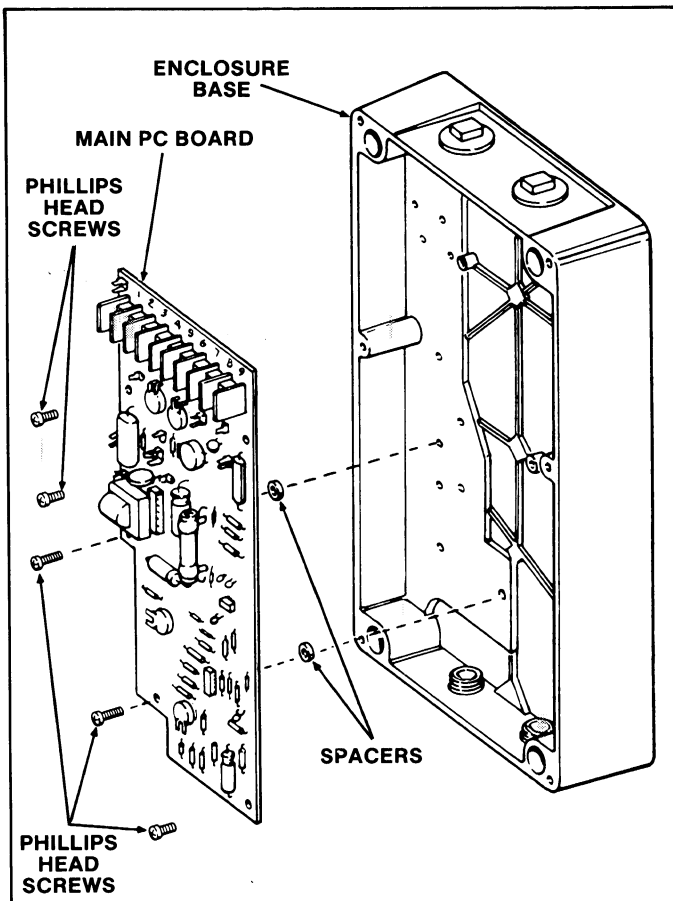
PC Board Mounting — NEMA TYPE 4/13 ENCLOSURE
